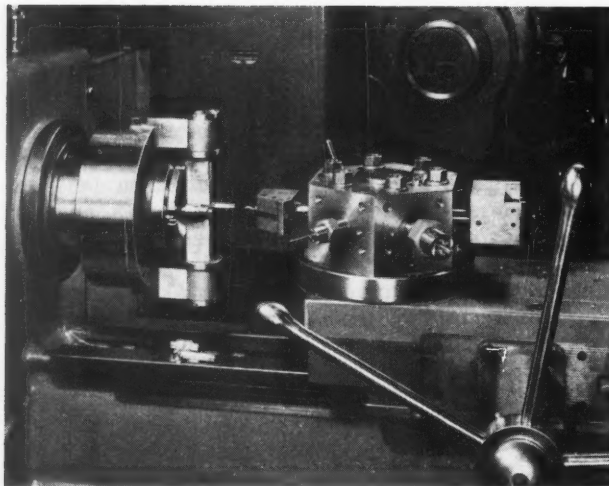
Warner & Swasey "Electro-Cycle" machine equipped with new air-operated indexing chuck
